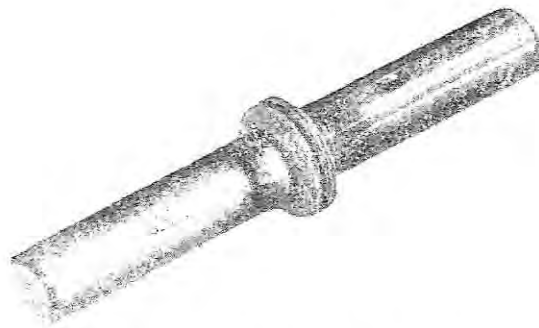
Friction welded steel rods showing the burr formed during welding.
